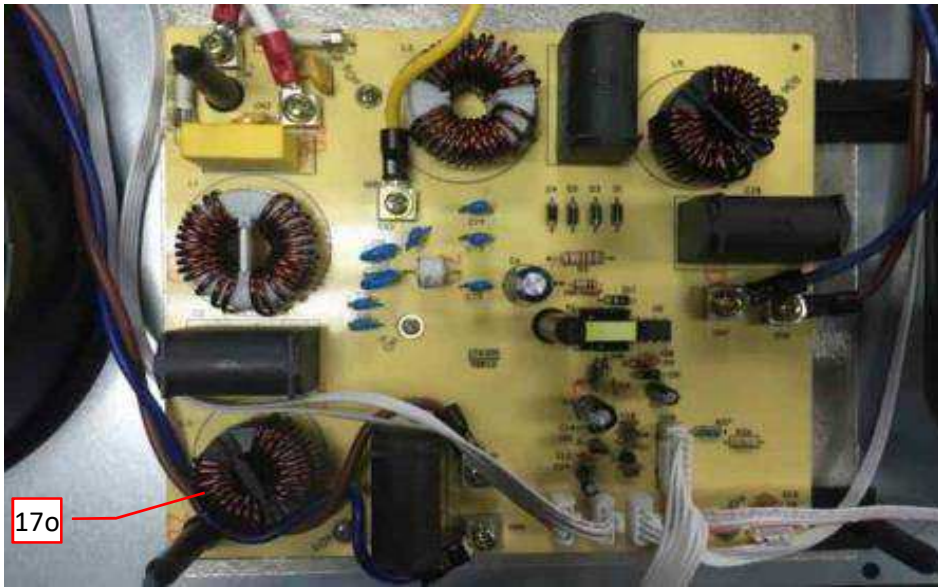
Internal view of C74E Power PCB 01 (bottom)
